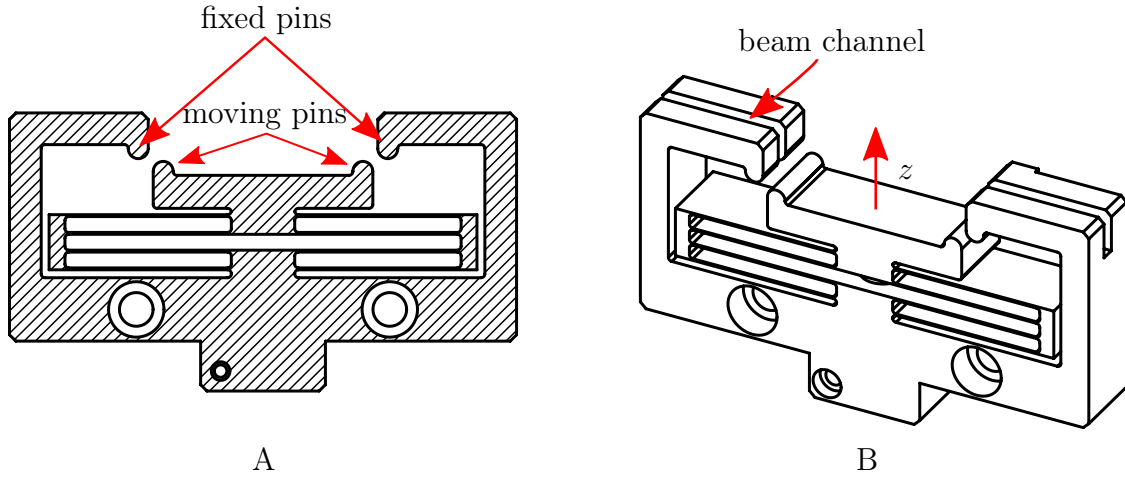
Drawing of the flexure based four point wafer bending fixture. View A is the front view of the fixture where the symmetric double-compound rectilinear flexure can be seen. View B is the trimetric view where the channel through the upper jaws can be seen which allows the reflected X-rays to pass.
